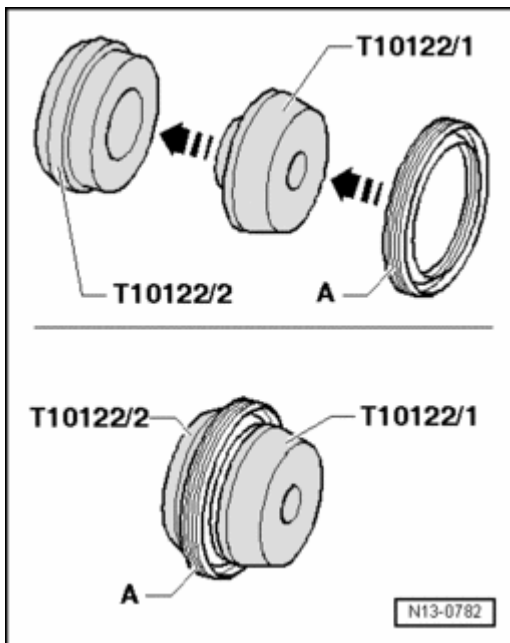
Identifying Seal, Sleeve T10122/1 And Assembly Tool T10122/2
